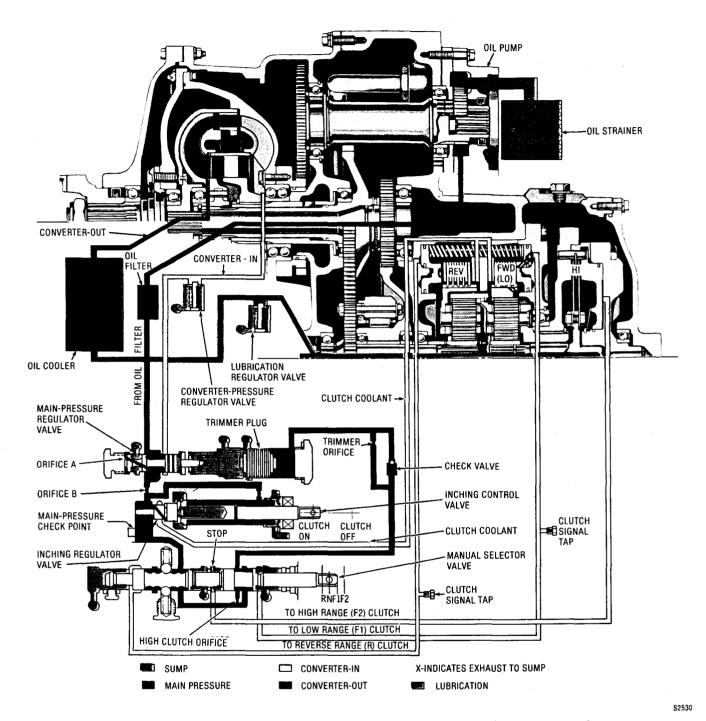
TT 2221-1, TT 2421-1 hydraulic system with inching control
